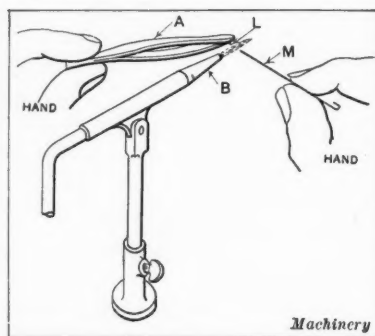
Welding Tungsten and Platinum Wires
